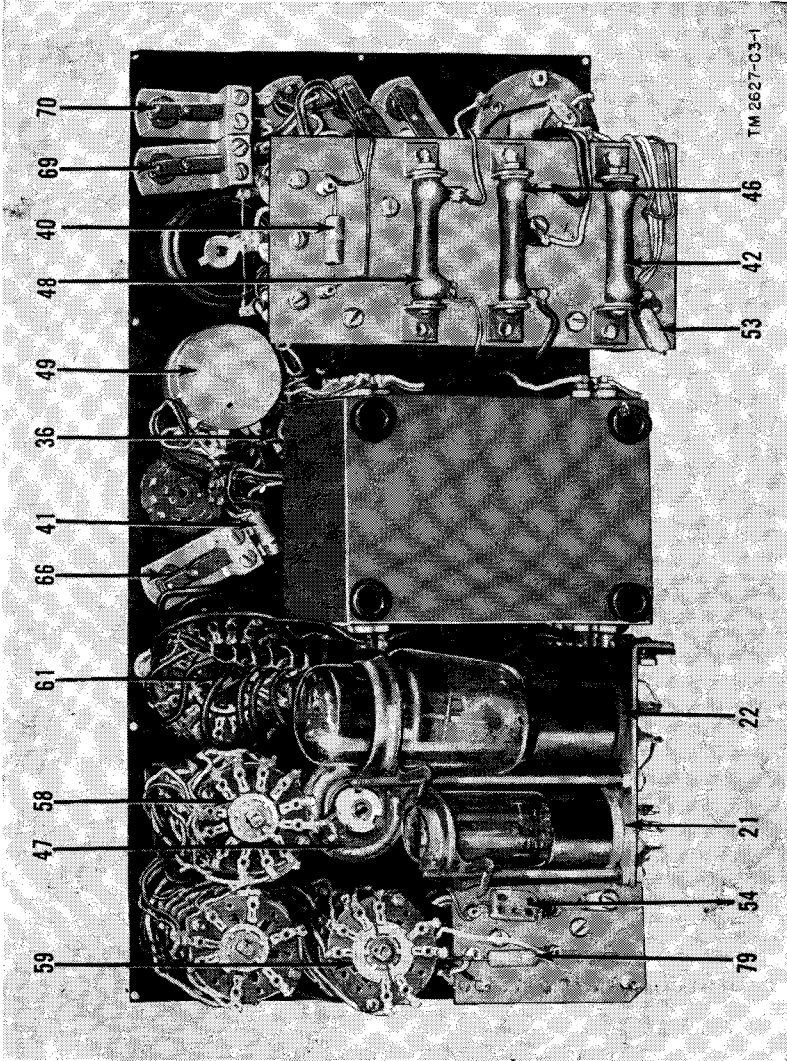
(Added) Bottom view of chassis of Tube Tester I-177-B.
